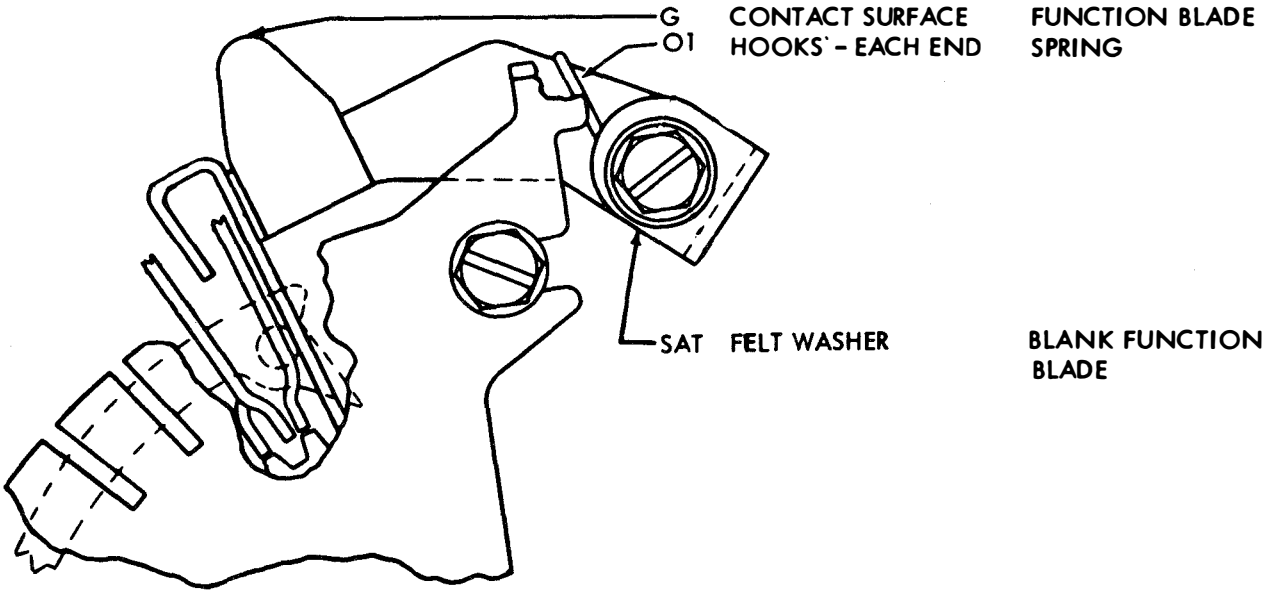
Blank Delete Mechanism (Sheet 2 of 2)
